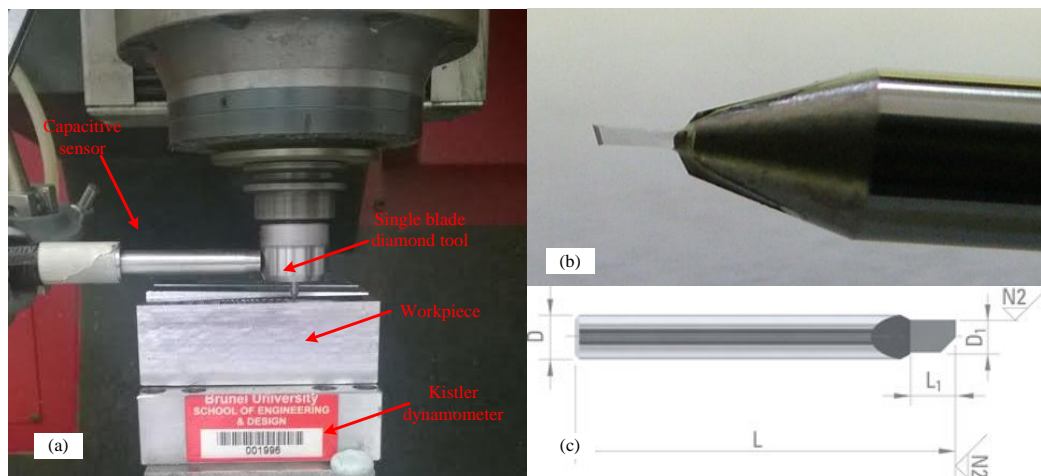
(a) Experiments of single blade tool on micro-milling machine (b) natural diamond single blade tool (c) tungsten carbide single blade tool
